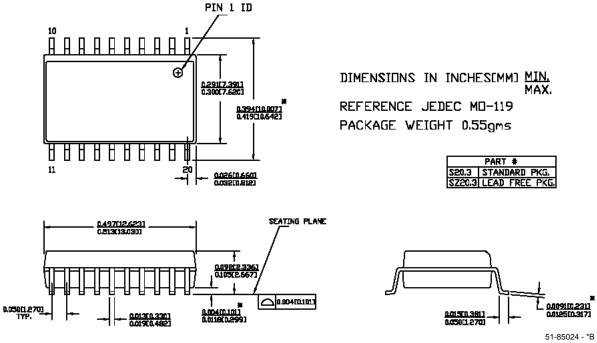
20-Lead (300-Mil) Molded SOIC
